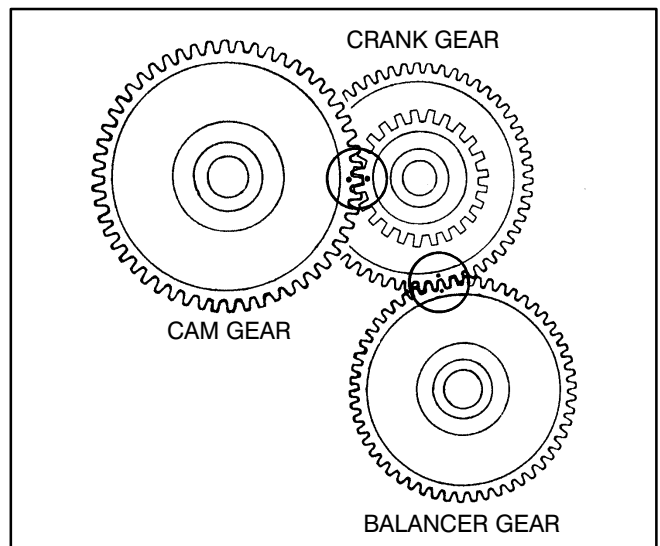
CAM, CRANK AND BALANCER GEAR ALIGNMENT
